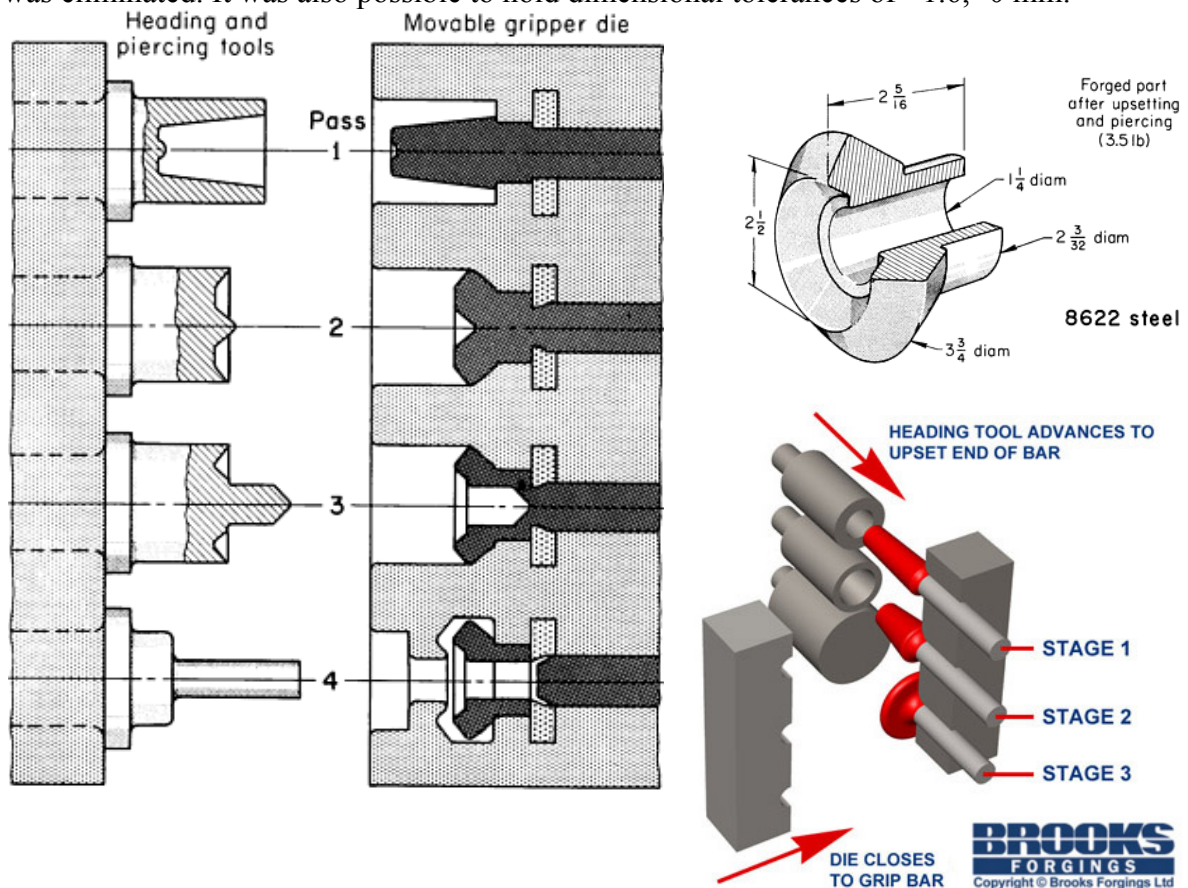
Gear blank produced by four-pass hot upsetting and piercing in the tooling arrangement shown, with almost no metal loss and no trimming required. Dimensions given in inches
